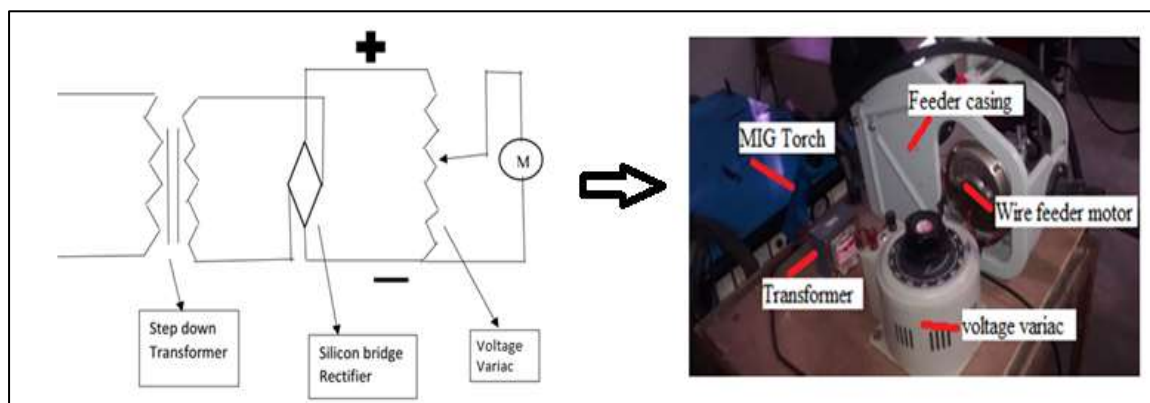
Circuit Diagram of Custom Built Wire Feeder and Custom Build Wire Feeder for Pulse TIG Welding
